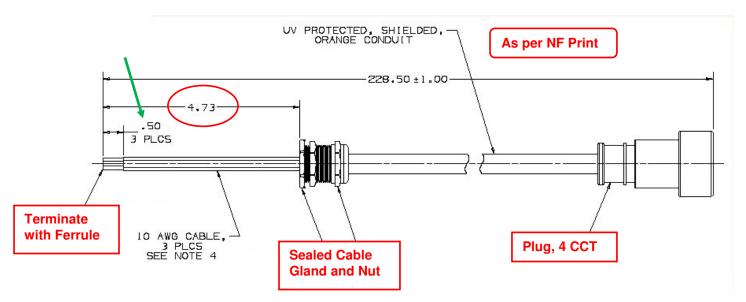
Wire preparation for ferrules, PN: 463828 P/S Air Compressor Cable Assembly.
